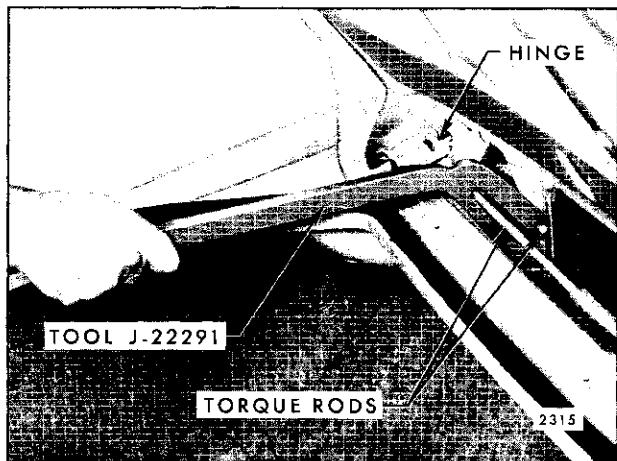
Usage of Tool J-22291 on - Oldsmobile and Buick "E" Styles
